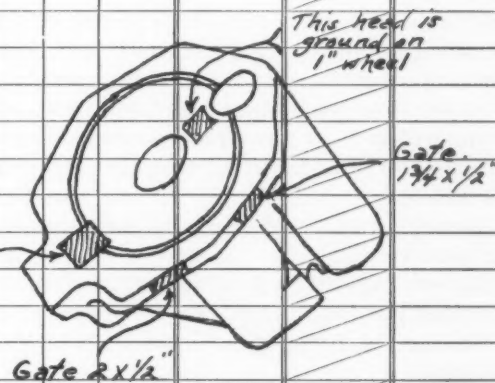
Time study sheet for stand grinding on 3-in. wheel.
